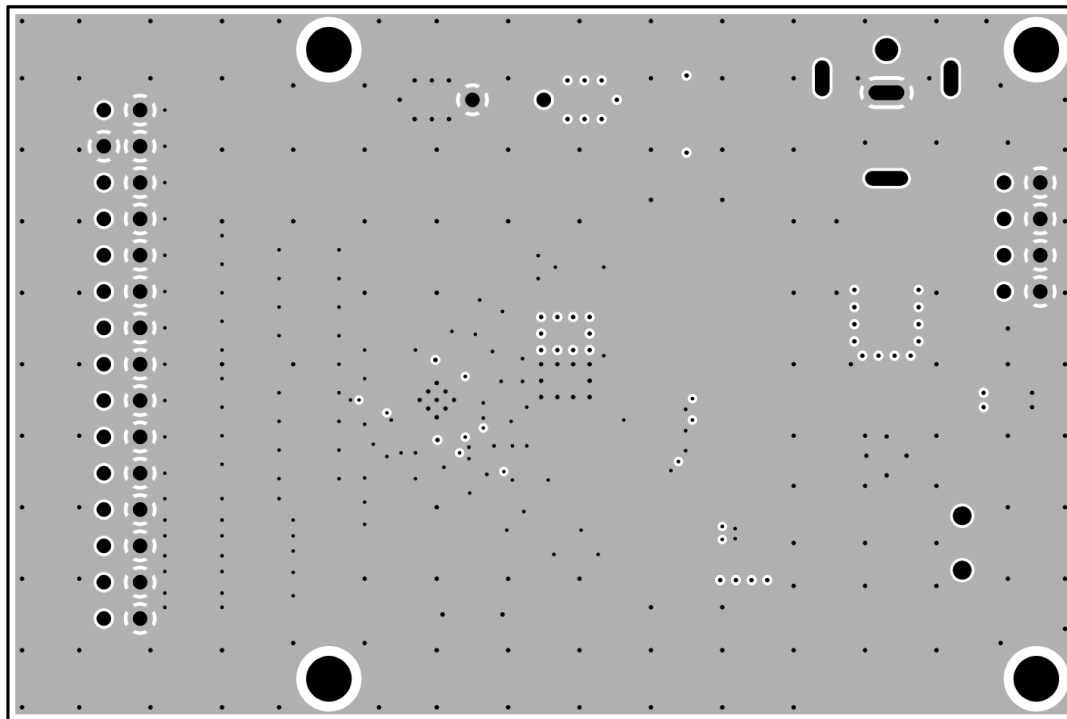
Layout view – Layer 2 – Ground (not to scale)
